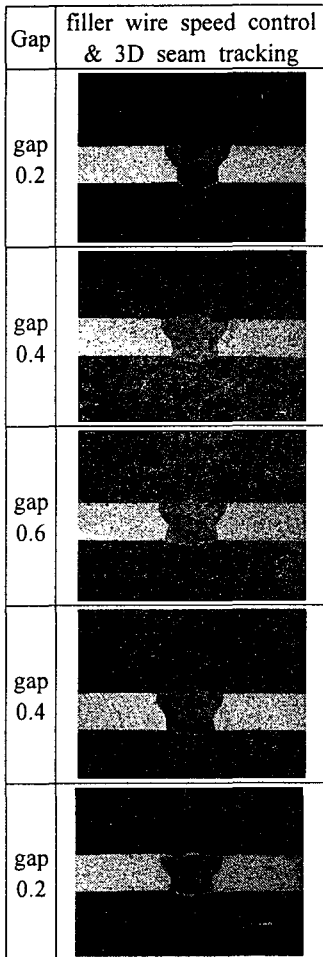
The welding bead shape with controlled wire feeding of Fig. 1(b)
